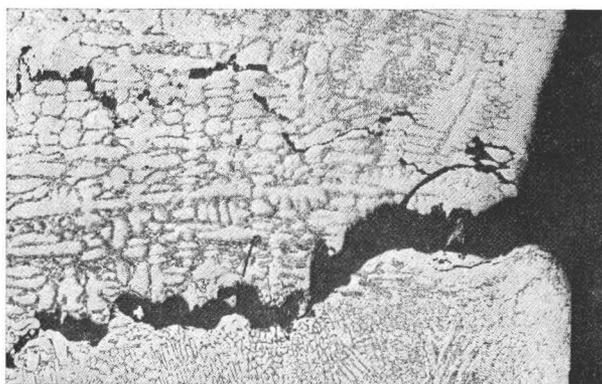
Circumferential weld cracking of a cast HK40 reformer tube after 12 months operation. Weld made with metal arc electrodes of approximately matching composition.
